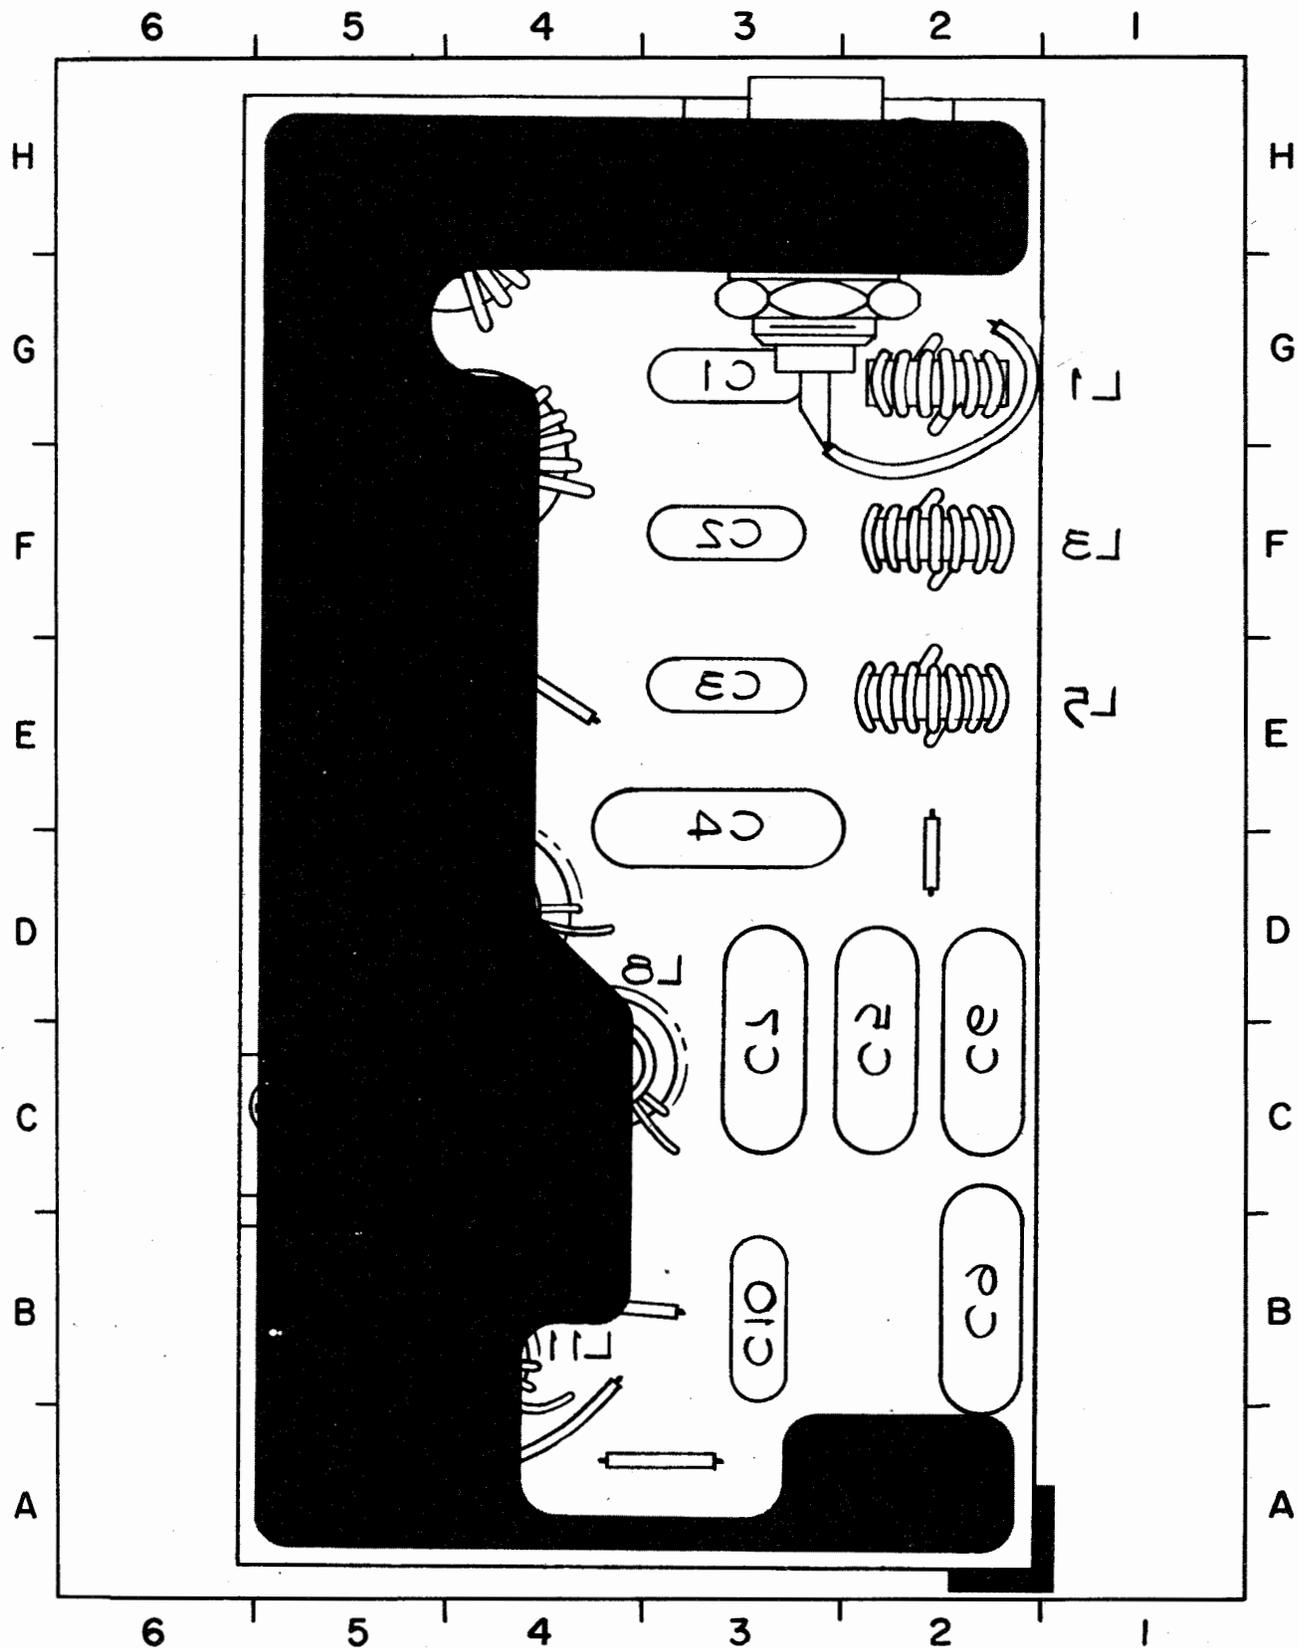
RF Filter, 1A1, 34-0122, Parts Location (Bottom View) (Sheet 2 of 2)
